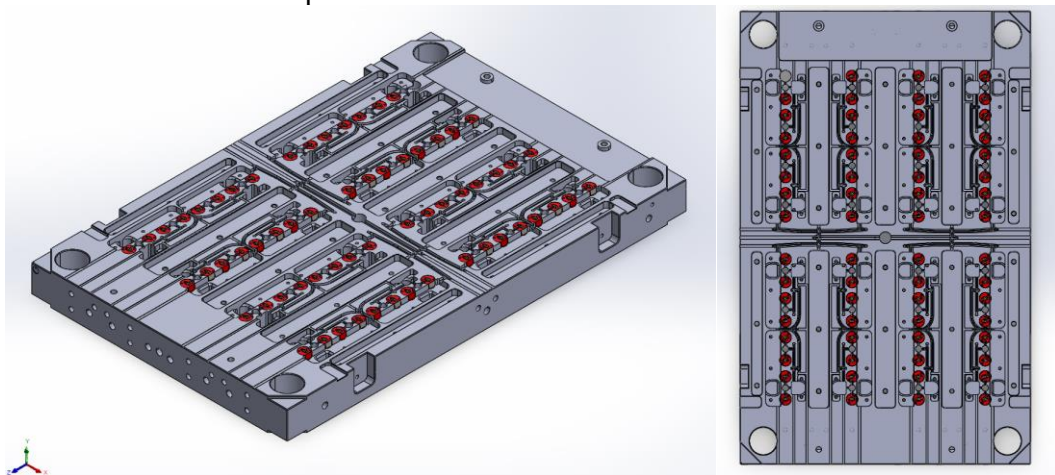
Fixed molded plate, (a) Isometric view, (b) Top view.
